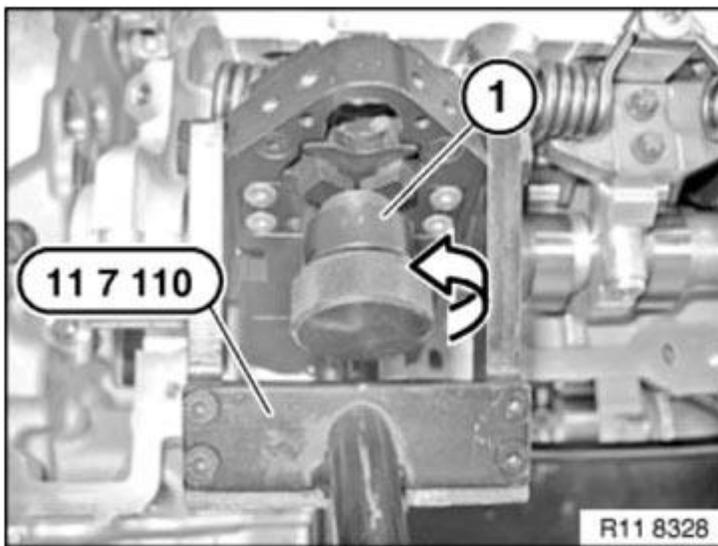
Releasing Knurled Screw On Special Tool (11 7 110)
